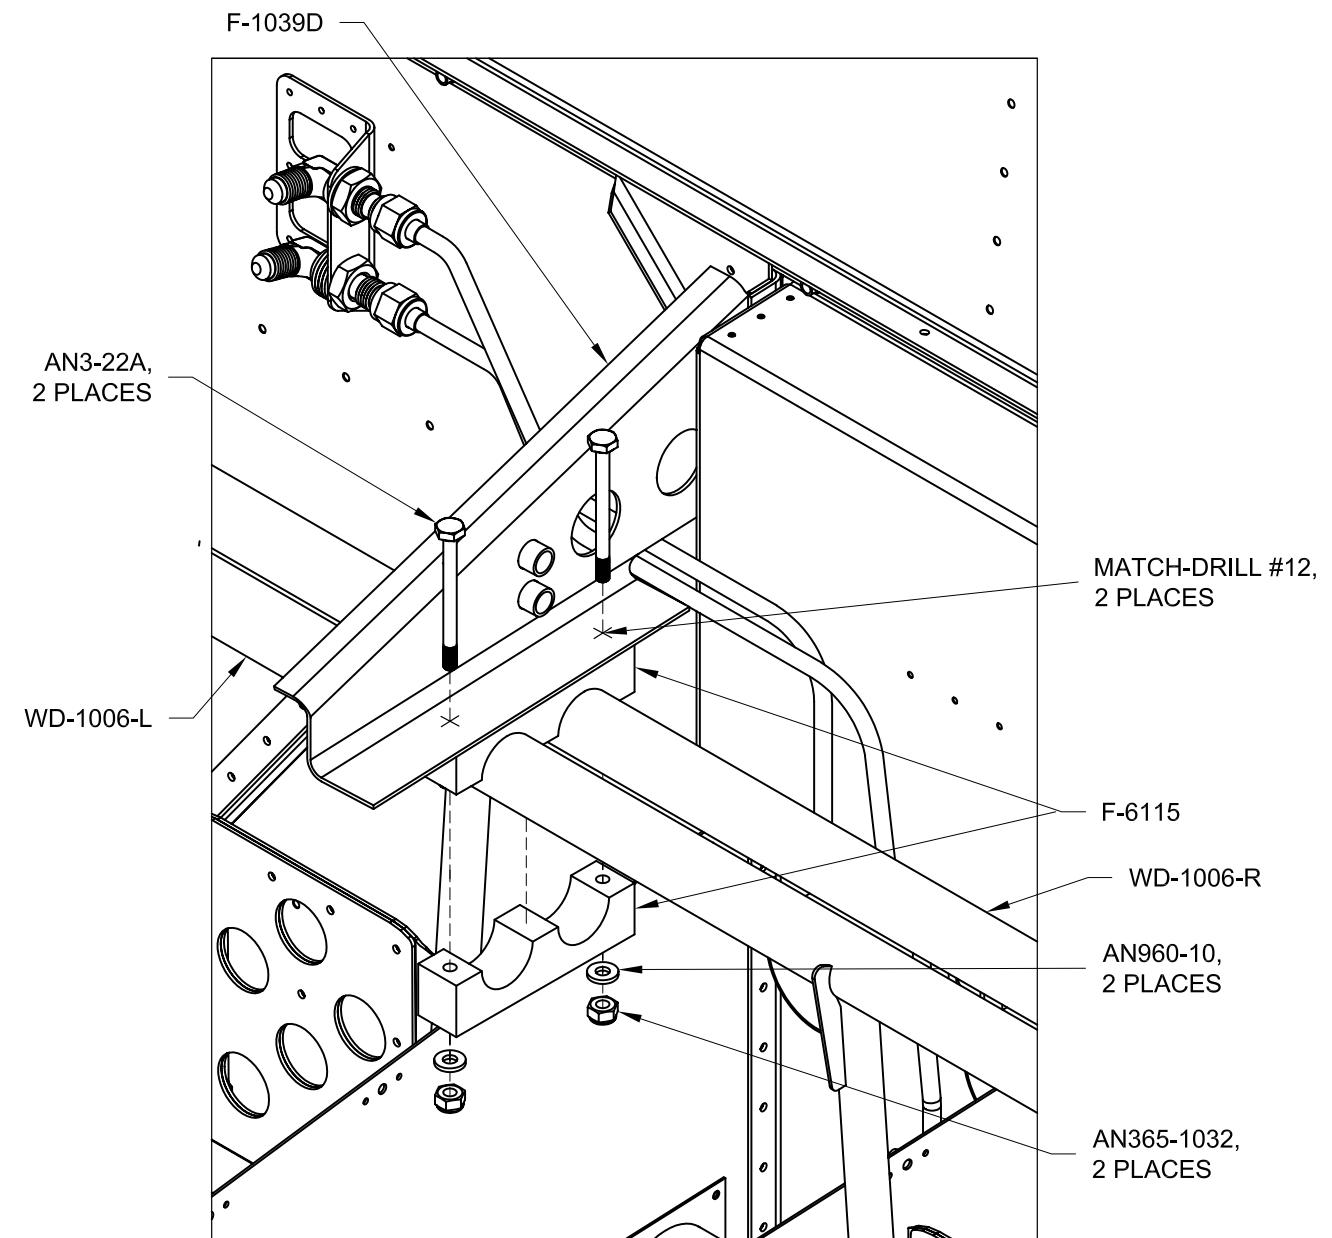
INSTALLING THE BEARING BLOCK TO THE RUDDER PEDAL BRACE
